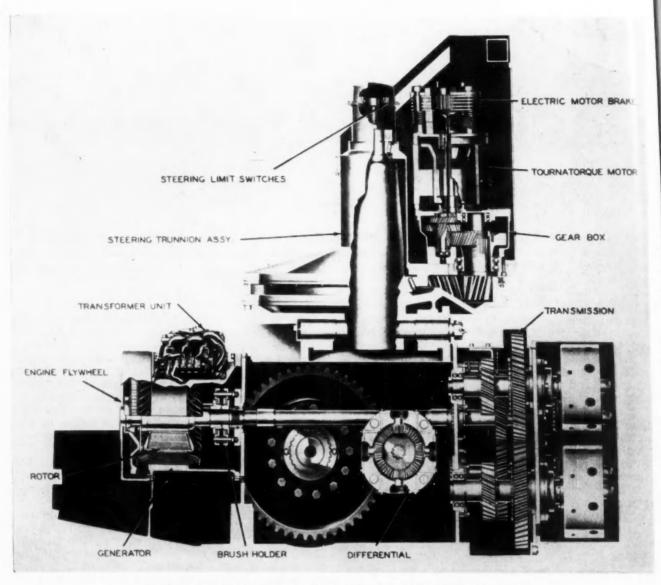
Cross-section of generator and steering motor for the Tournapull earthmover
